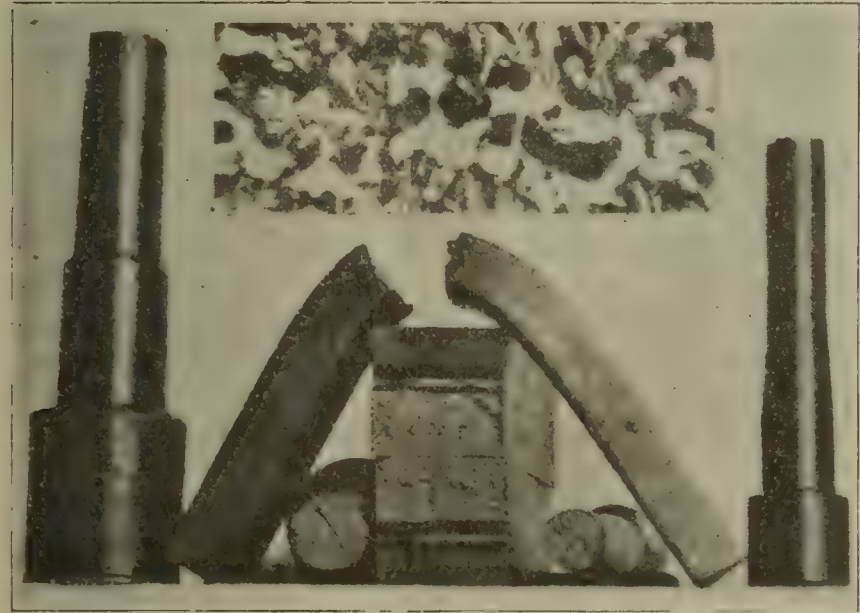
TESTS ON RAW 0.34 C STEEL CASTING
